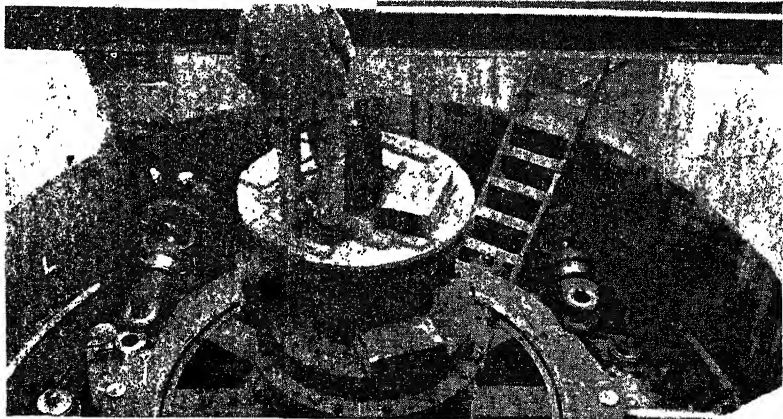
Guide bearing housing, shaft, and servomotors.
